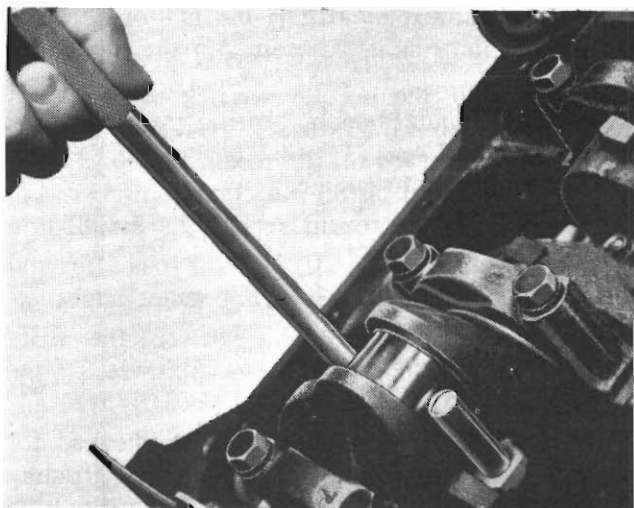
Removing and installing connecting rod (Tool E9C50D)
